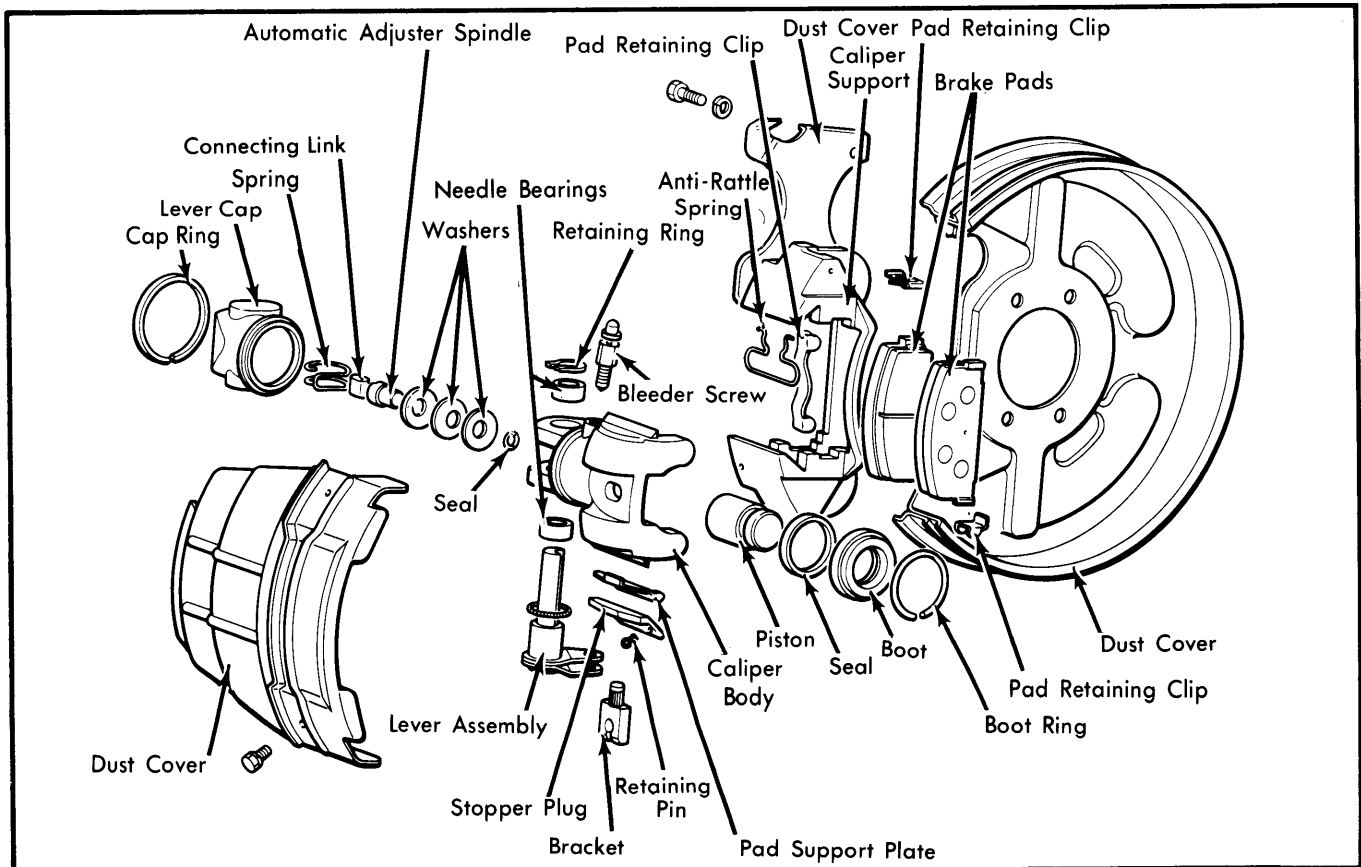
Exploded View of Rear Disc Brake Caliper Assembly Used on Challenger and Sapporo Models with 2600 cc Engine
